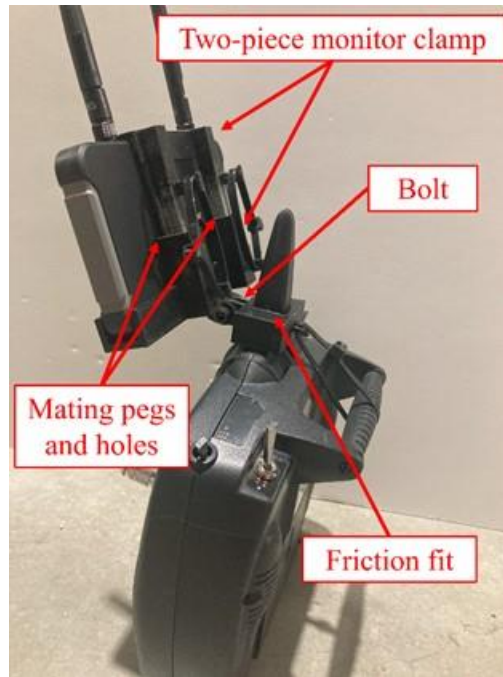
3D printed parts mounting the FPV monitor to the radio remote
